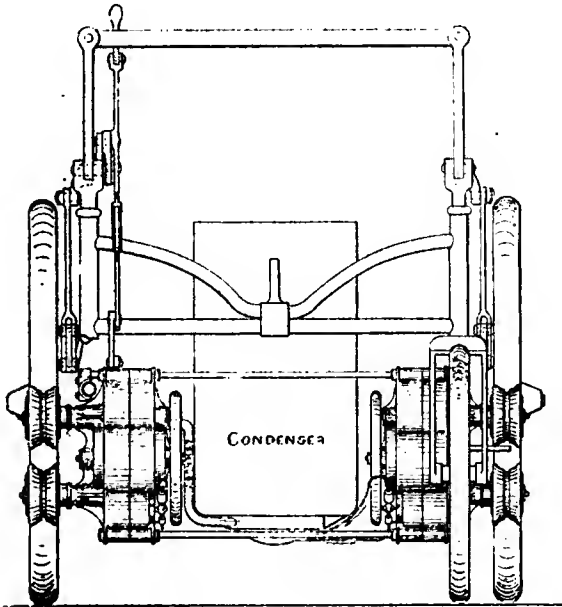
HOLT'S STEAM CARRIAGE—FRONT VIEW.
